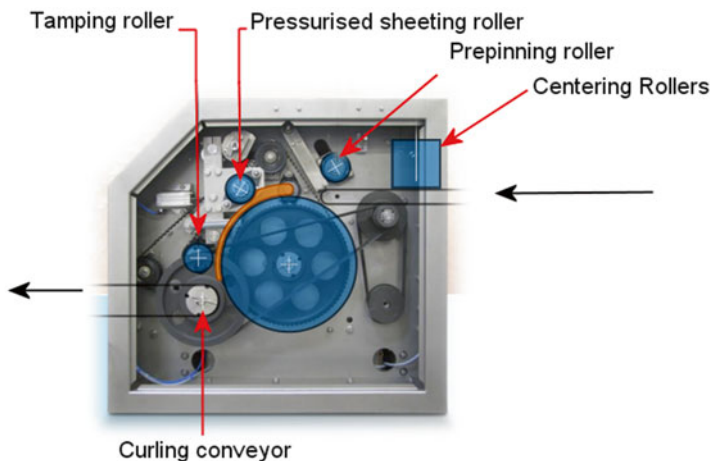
Drum and roller sheeting action (courtesy Benier bv)
